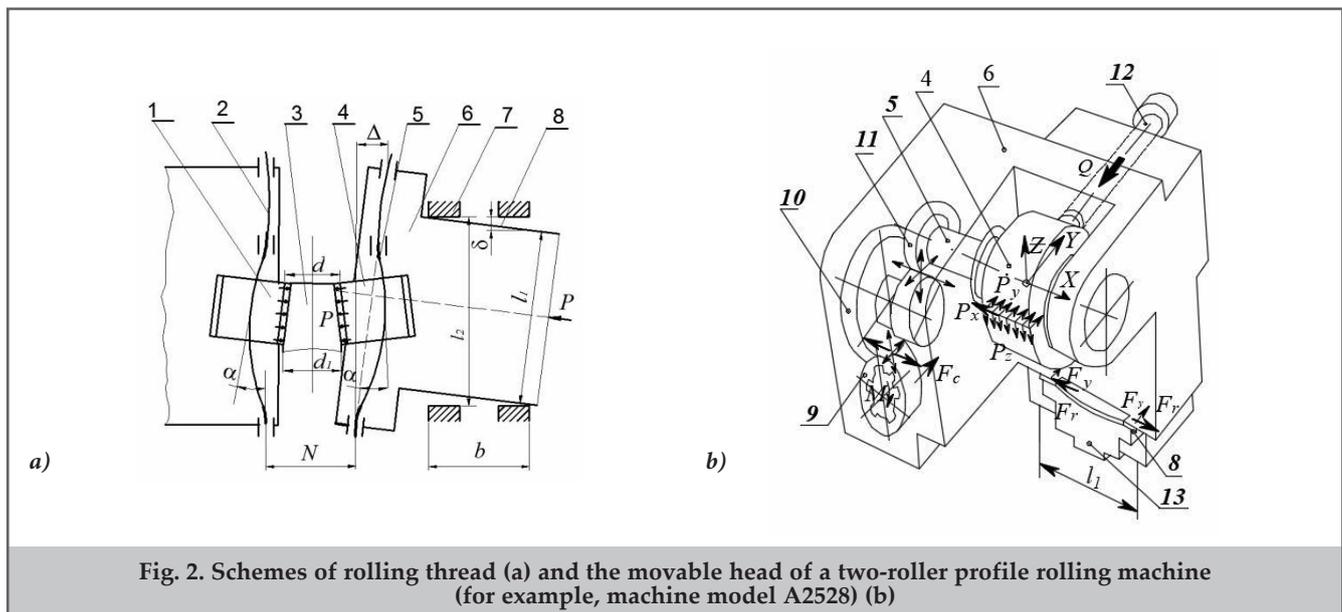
Schemes of rolling thread (a) and the movable head of a two-roller profile rolling machine (for example, machine model A2528) (b)
